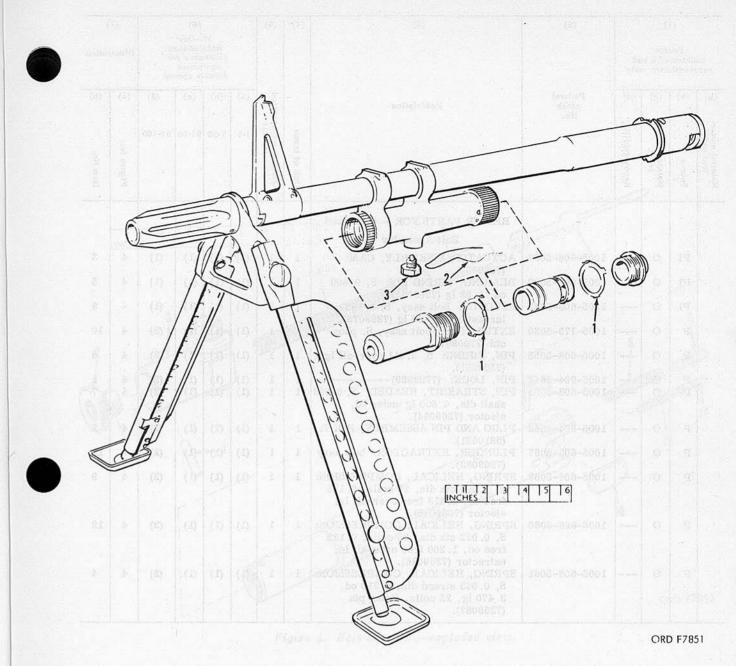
Barrel assembly with bipod assembly-partial exploded view.
